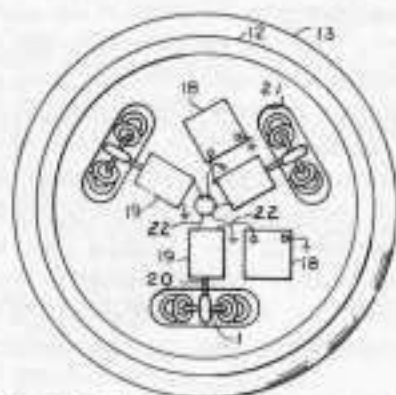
A bottom view of the bumper car with the drive motors, battery, and controls shown schematically.
